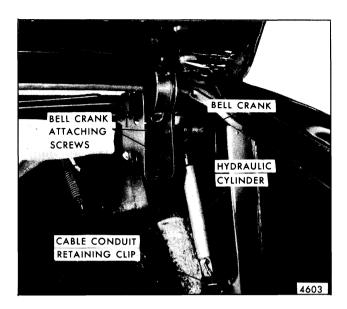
Mechanical Pull-Down Unit Hydraulic Cylinder - Cadillac "E" Styles
